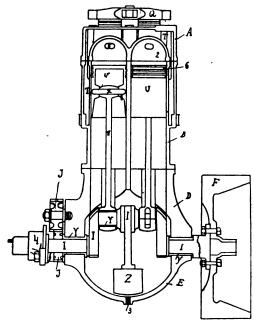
SECTIONAL VIEW OF MOTOR.
